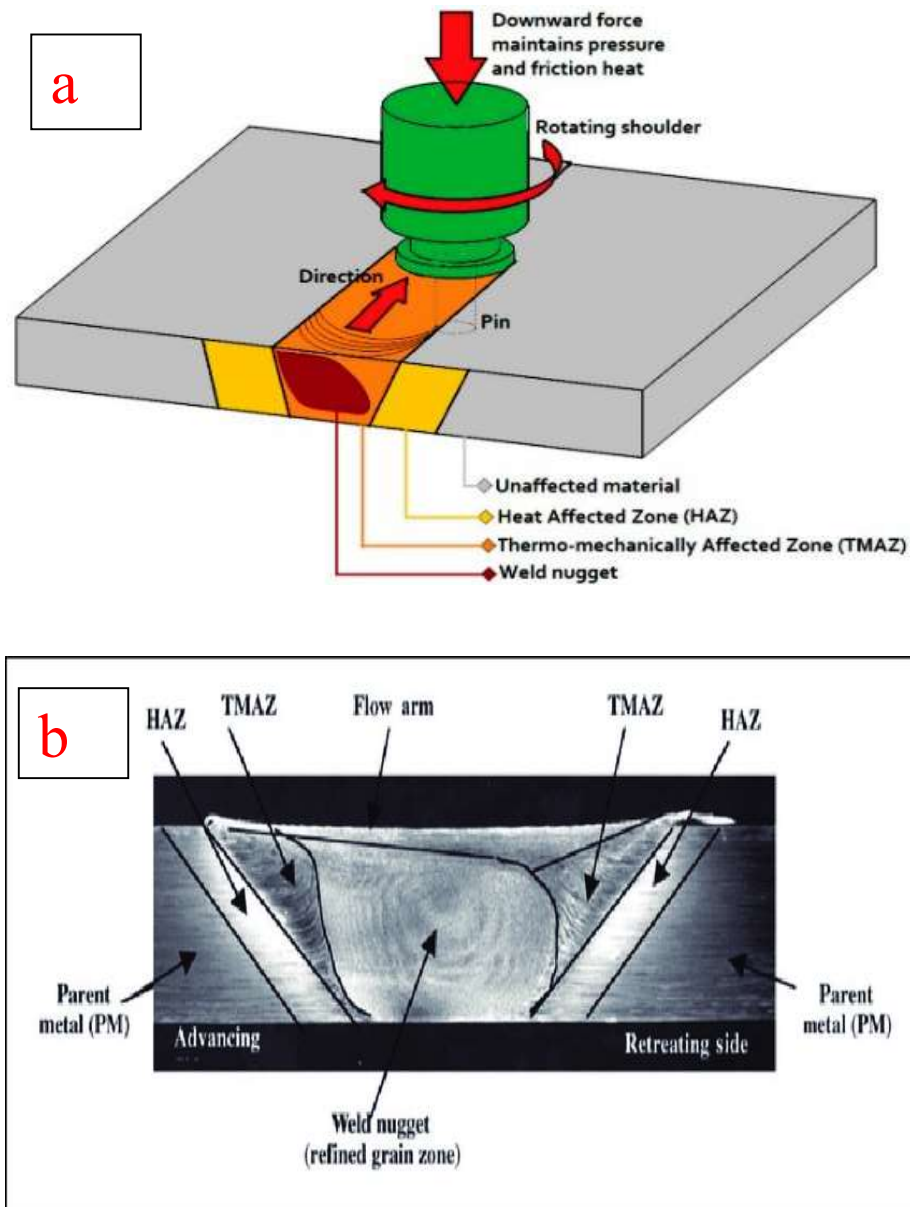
a) Schematic Diagram of FSW welding b) Different regions of Friction Stir Welded Zones Ref. <http://katjakovanen.com/Slavic-force-and-friction-experiments-for-kids/>. [17]
